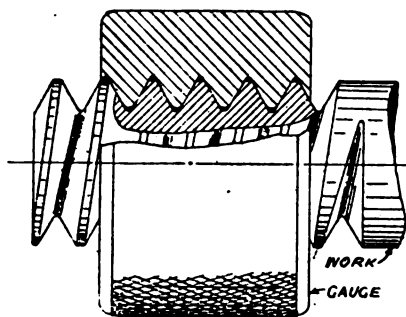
Showing Clearance at Bottom of Spaces in Ring Gauges to clear Flat Tops of Work Threads
